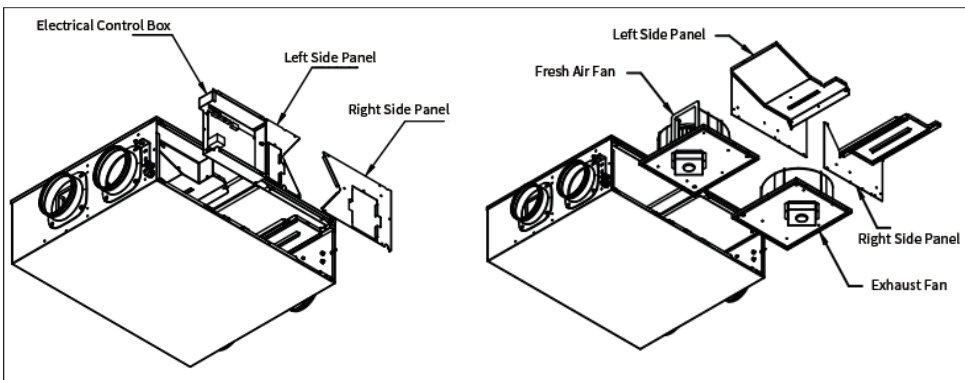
Disassembly Diagram for KOMFORT GLA D250/350(F) Fan
